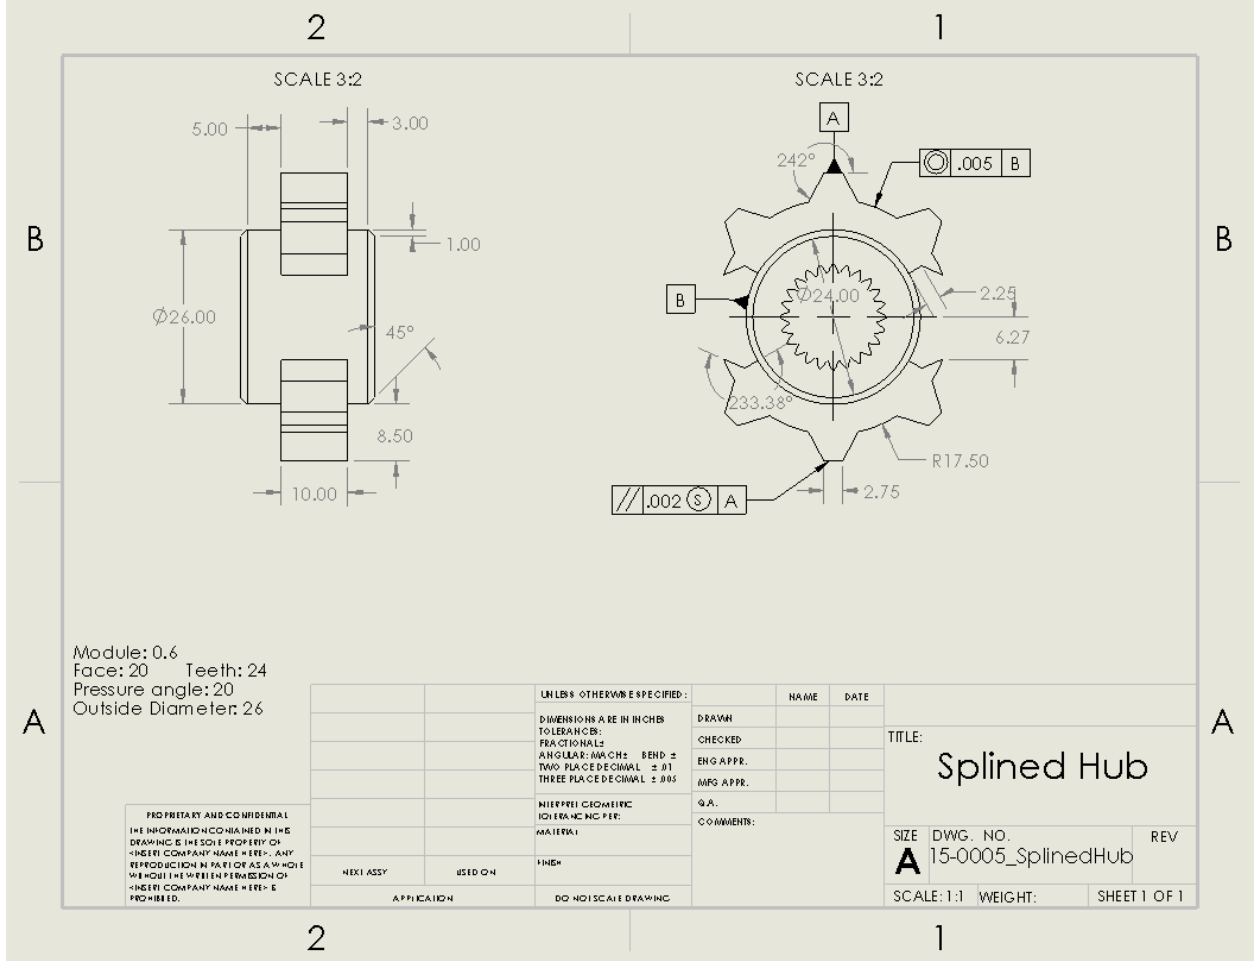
The splined hub is the fifth part to make for the clutch assembly. One can make the part by following along with the demo using the techniques used in minutes [1:05:00 – 1:13:00]: <https://youtu.be/azITzOcZ6-g>
